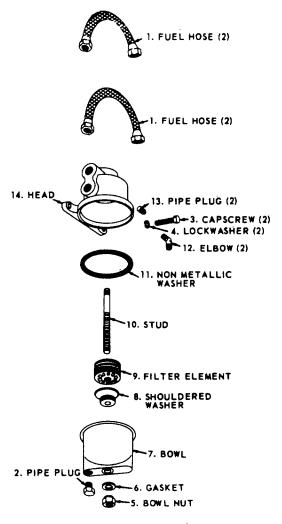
Primary fuel filter (on engine model 687C-18-ES only) removal, disassembly, reassembly and installation.
